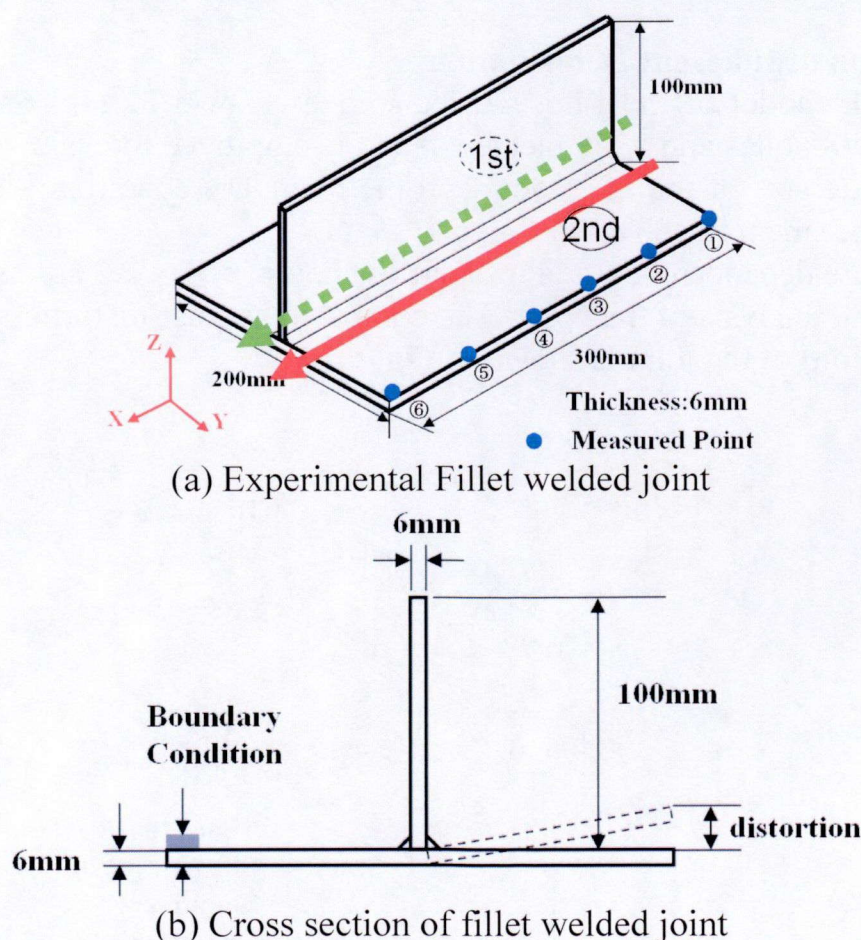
Dimensions and boundary condition of the fillet welded joint used in the experiment.
